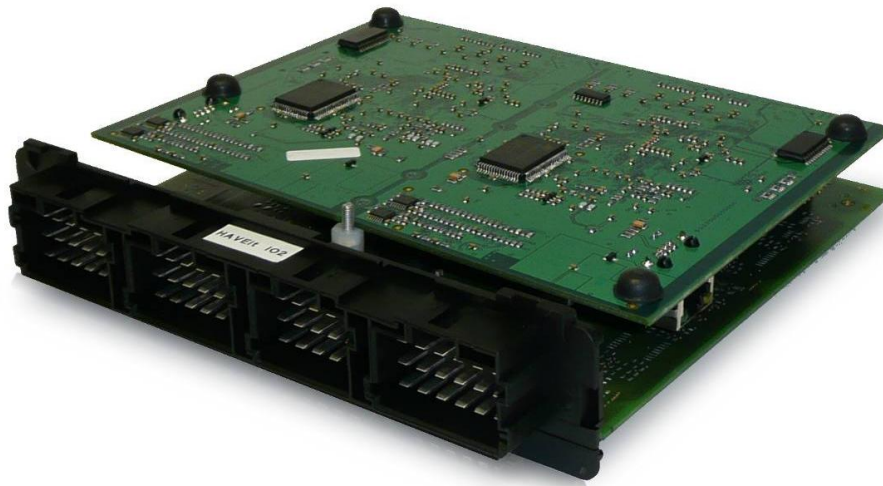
XCC – sandwich configuration (IO-board and CPU board)
